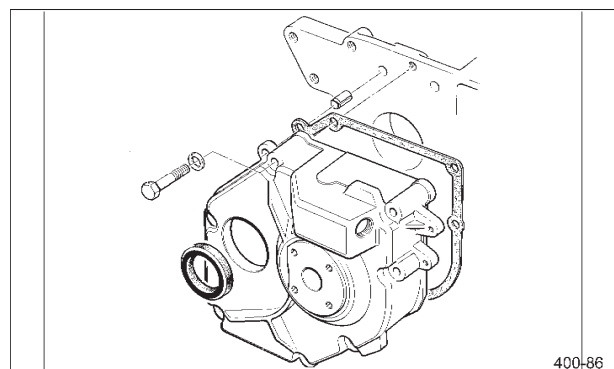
Gear End Cover - LPWS 400 Series
